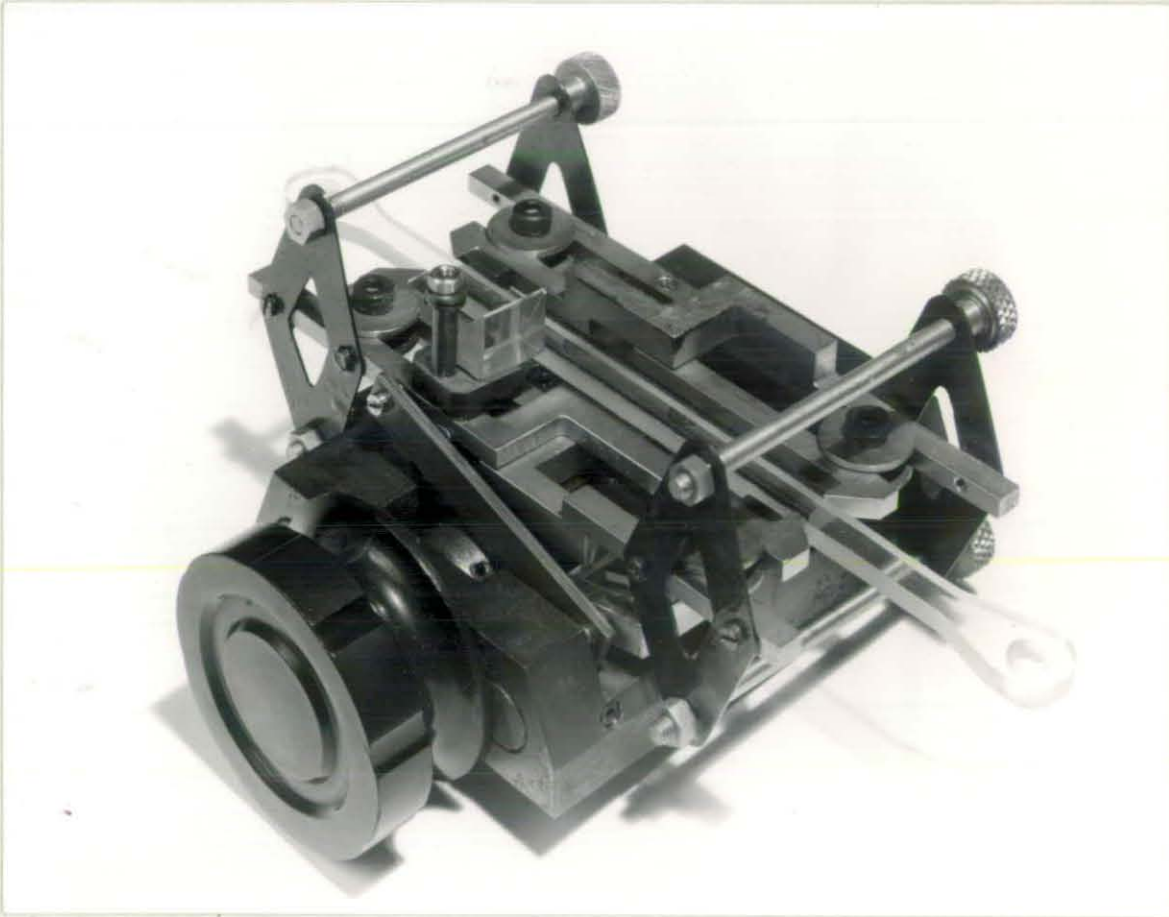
Extensometer setting-up jig for changing test specimens
